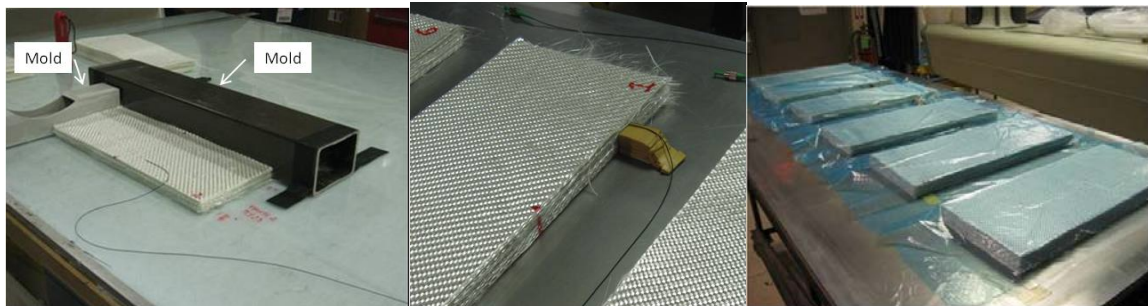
(left) mold set-up; (middle) sacrificial material for lead support; (right) test panels in vacuum bag
